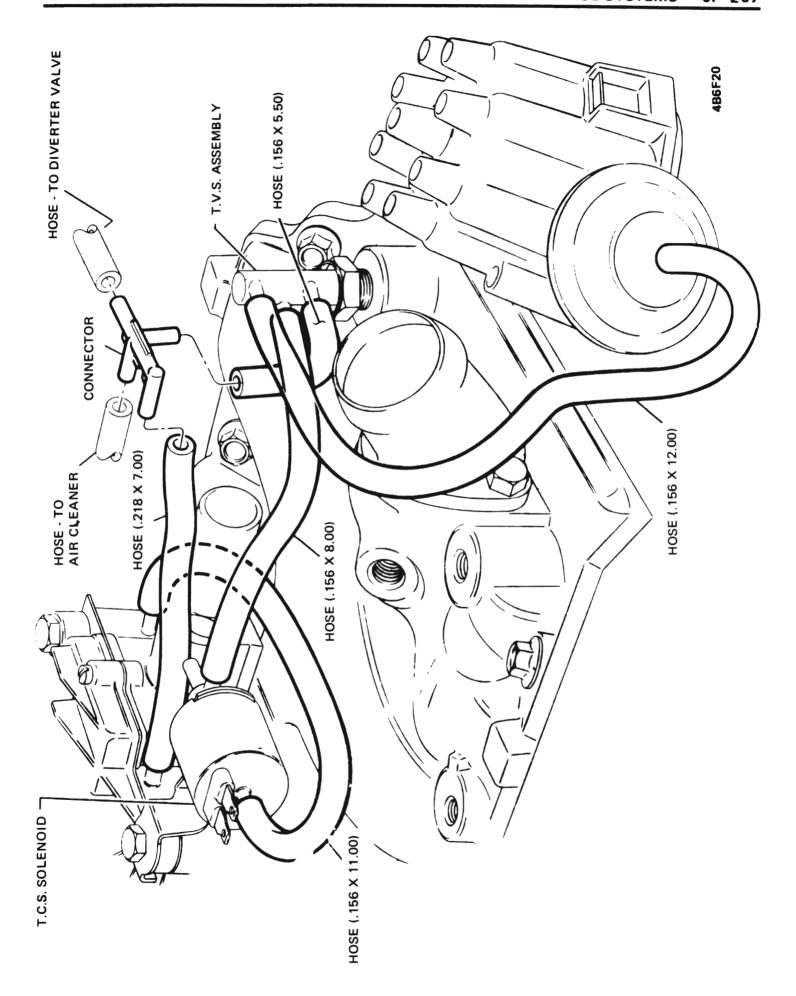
F-20 "A" Series Vacuum Hose Routing (Stage I Engine)
